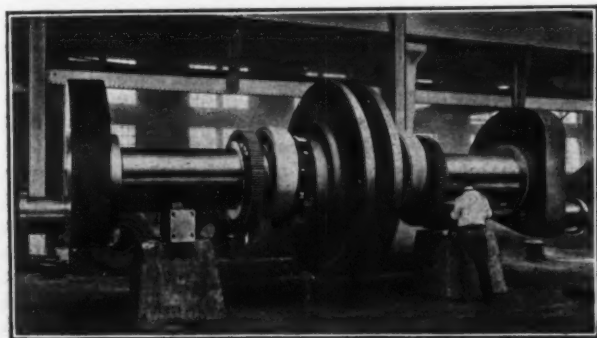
The Crank Shaft of a Double Tandem Blowing Engine.
